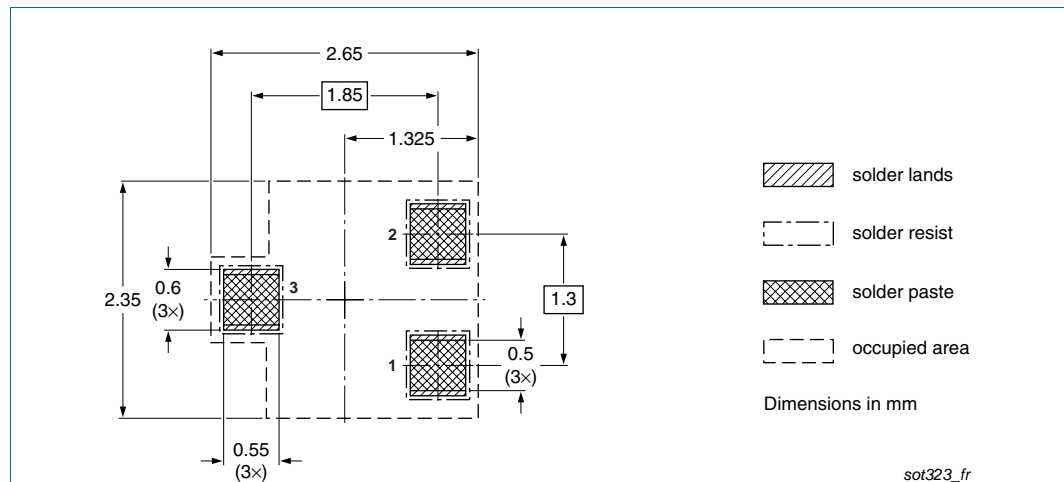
Reflow soldering footprint SOT323 (SC-70)
